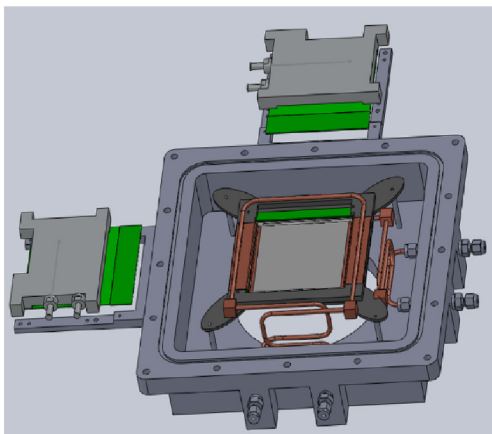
View of one half of the vacuum chamber. The detector and also the cooling is mounted in the center. The front-end electronic is located outside the chamber.
